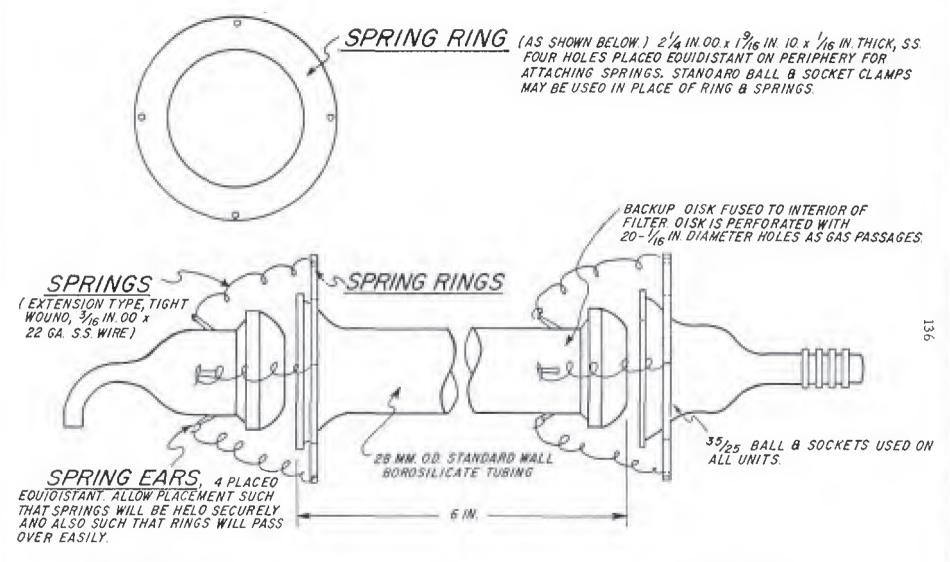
Exploded Diagram of Holder for Flat, Round Filters.
